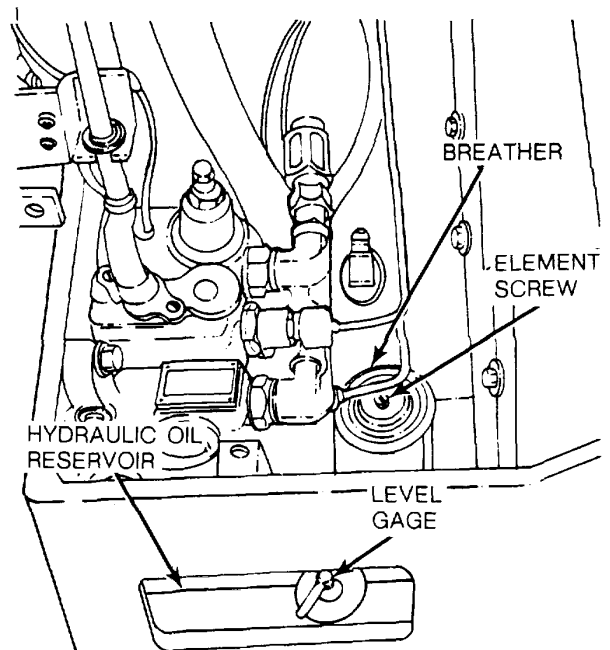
Hydraulic oil reservoir and breather, installed view
